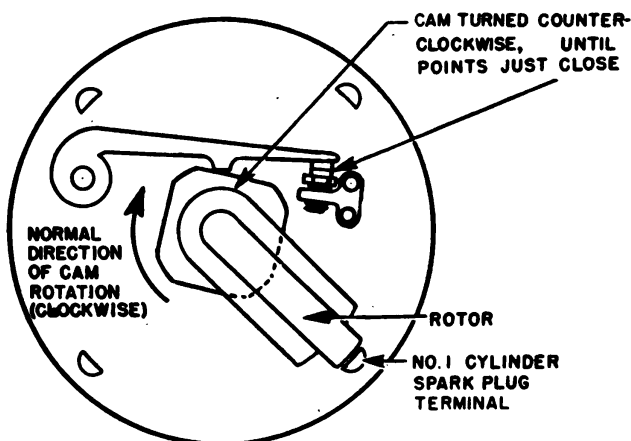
Timing the ignition system by rotating the breaker cam.
